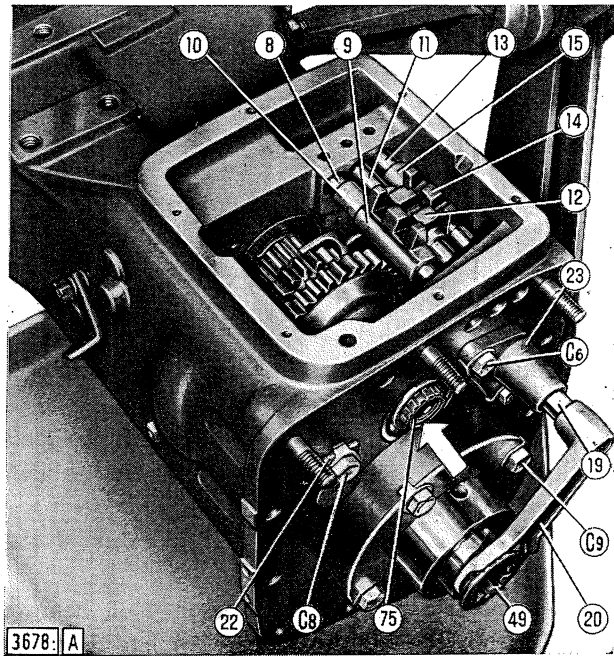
Transmission housing installed on turnover stand ARR 2220.
